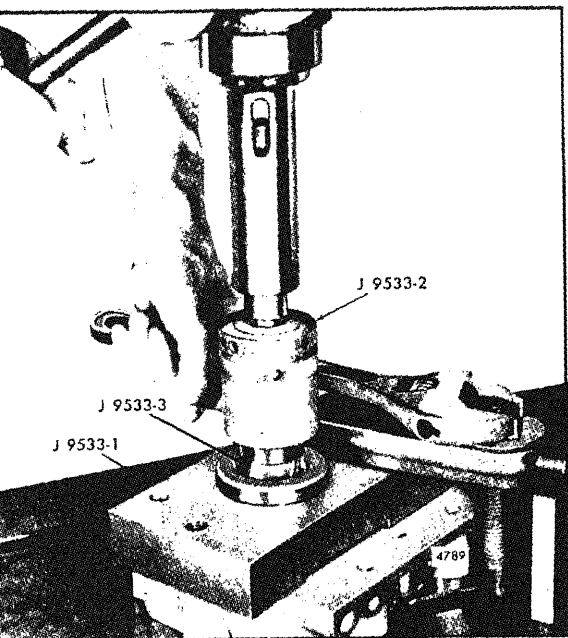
Positioning Cutting Tool in Fixture Guide
